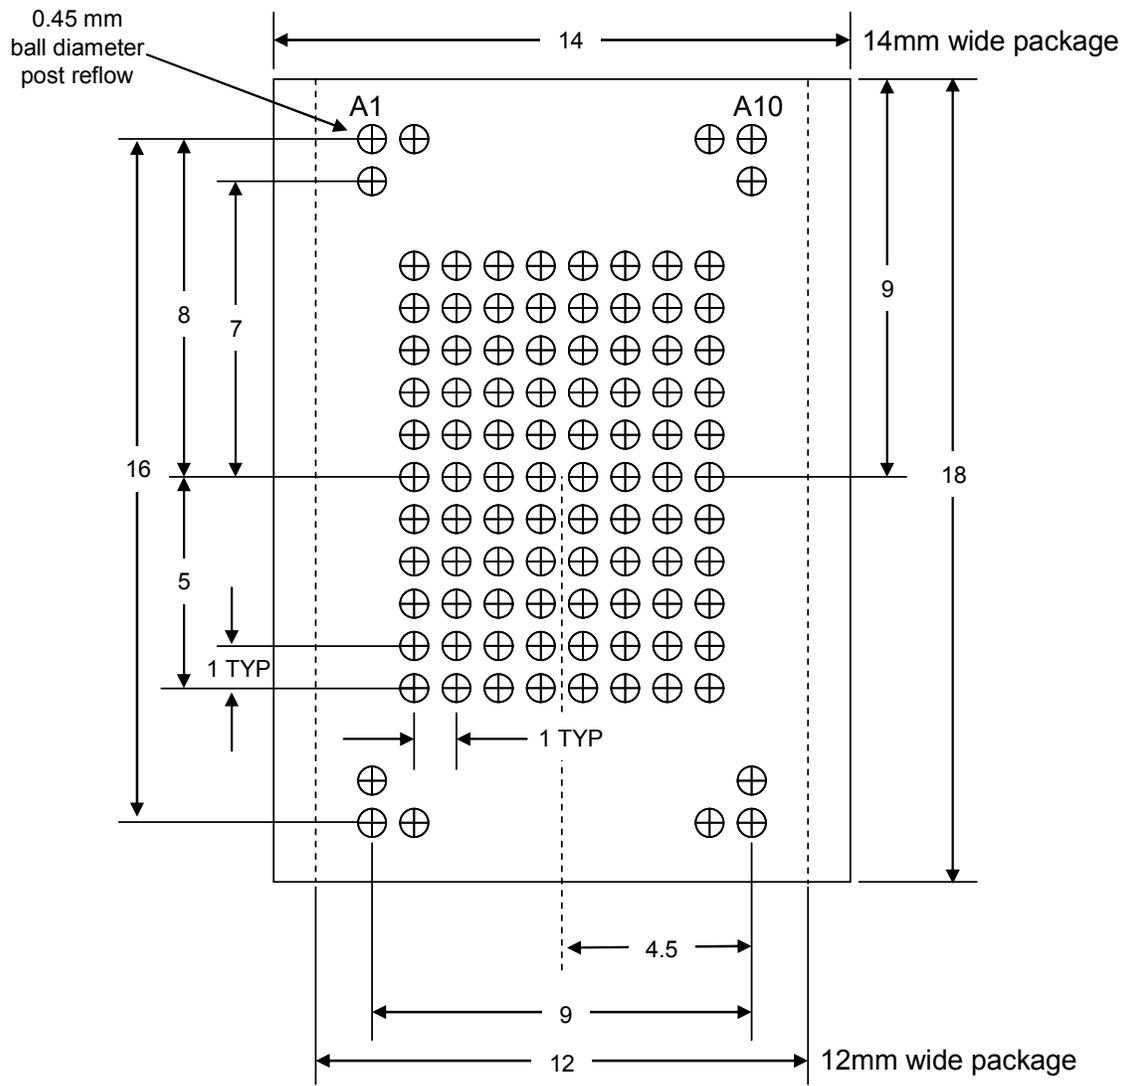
BGA-100 ball spacing requirements (top view, dimensions in millimeters)
